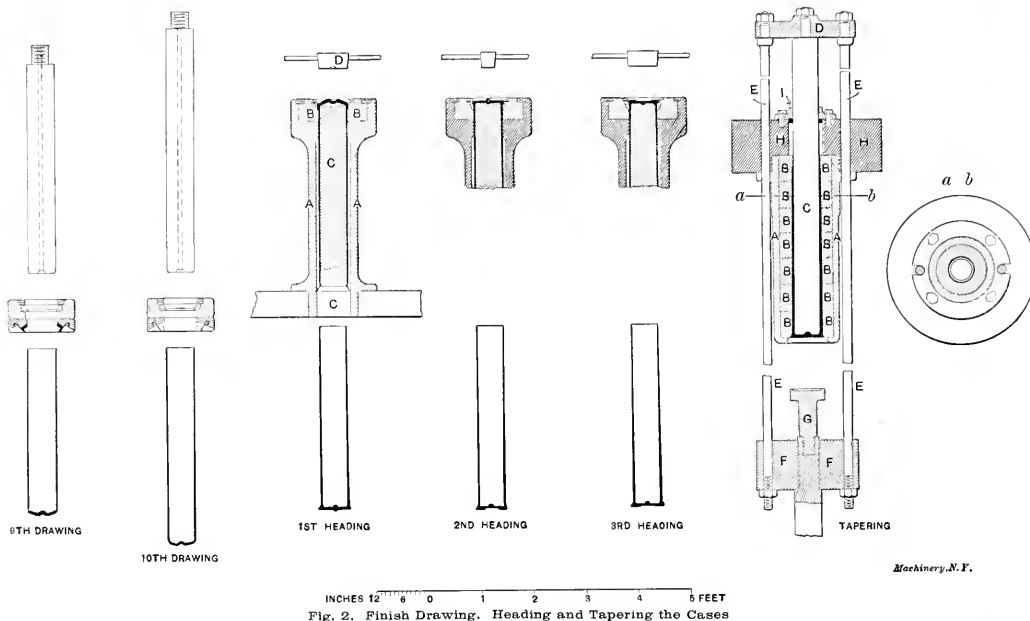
Finish Drawing. Heading and Tapering the Cases
